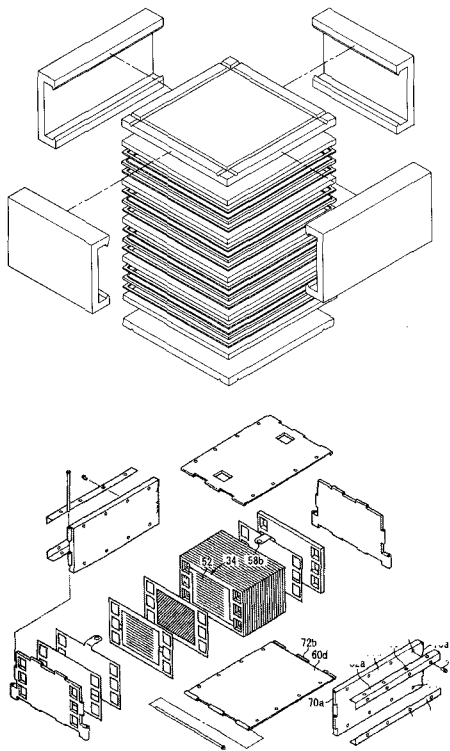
Flat board method. Sliding type (top) (modified from Ref. 28), and bolting type (bottom) (modified from Ref. 29)
